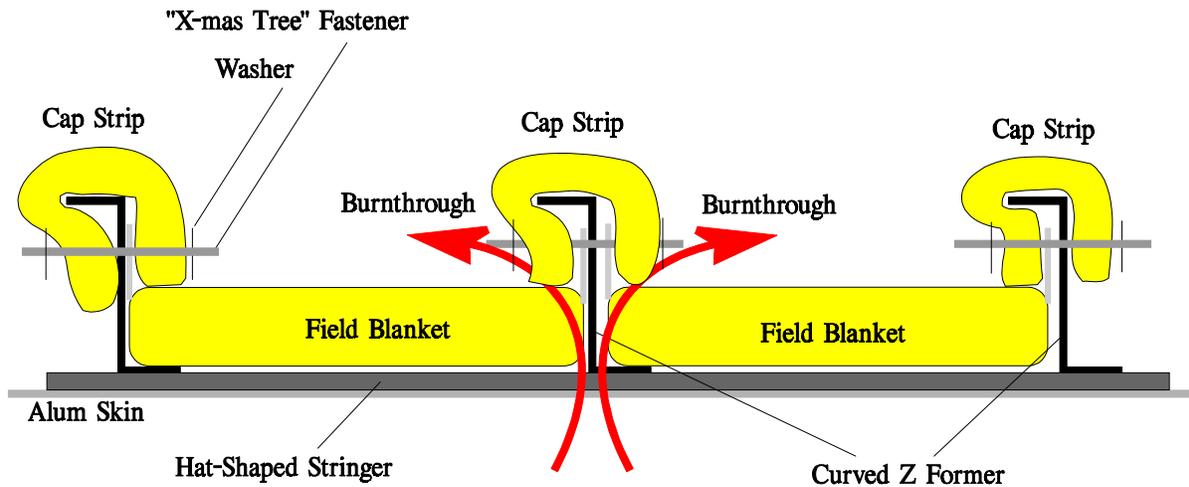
OEM STYLE OF BLANKET ATTACHMENT TO THE TEST RIG
